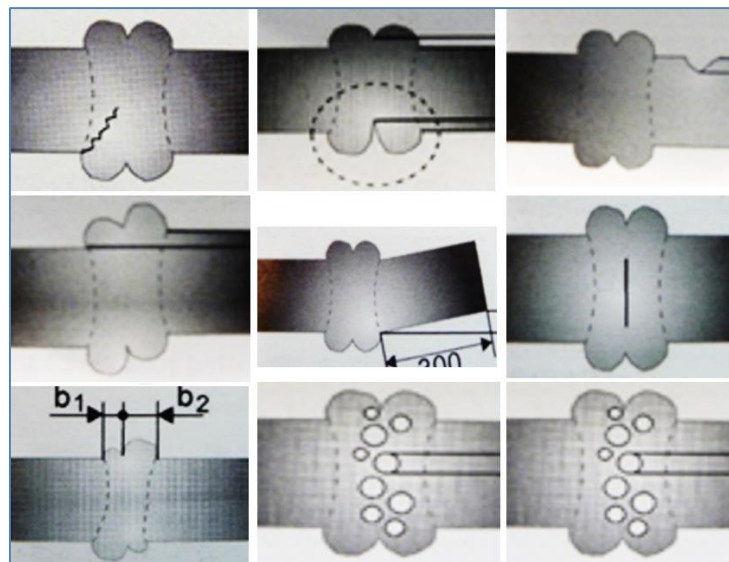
(Left to right, top to bottom) Cracks, Welding flash notches, Notches and score marks, Mismatch of joint faces, Angular mismatch of joint faces, Lack of fusion, Irregular weld bead width, Pores and foreign matter inclusions, Shrinkage cavities/pores [21]
